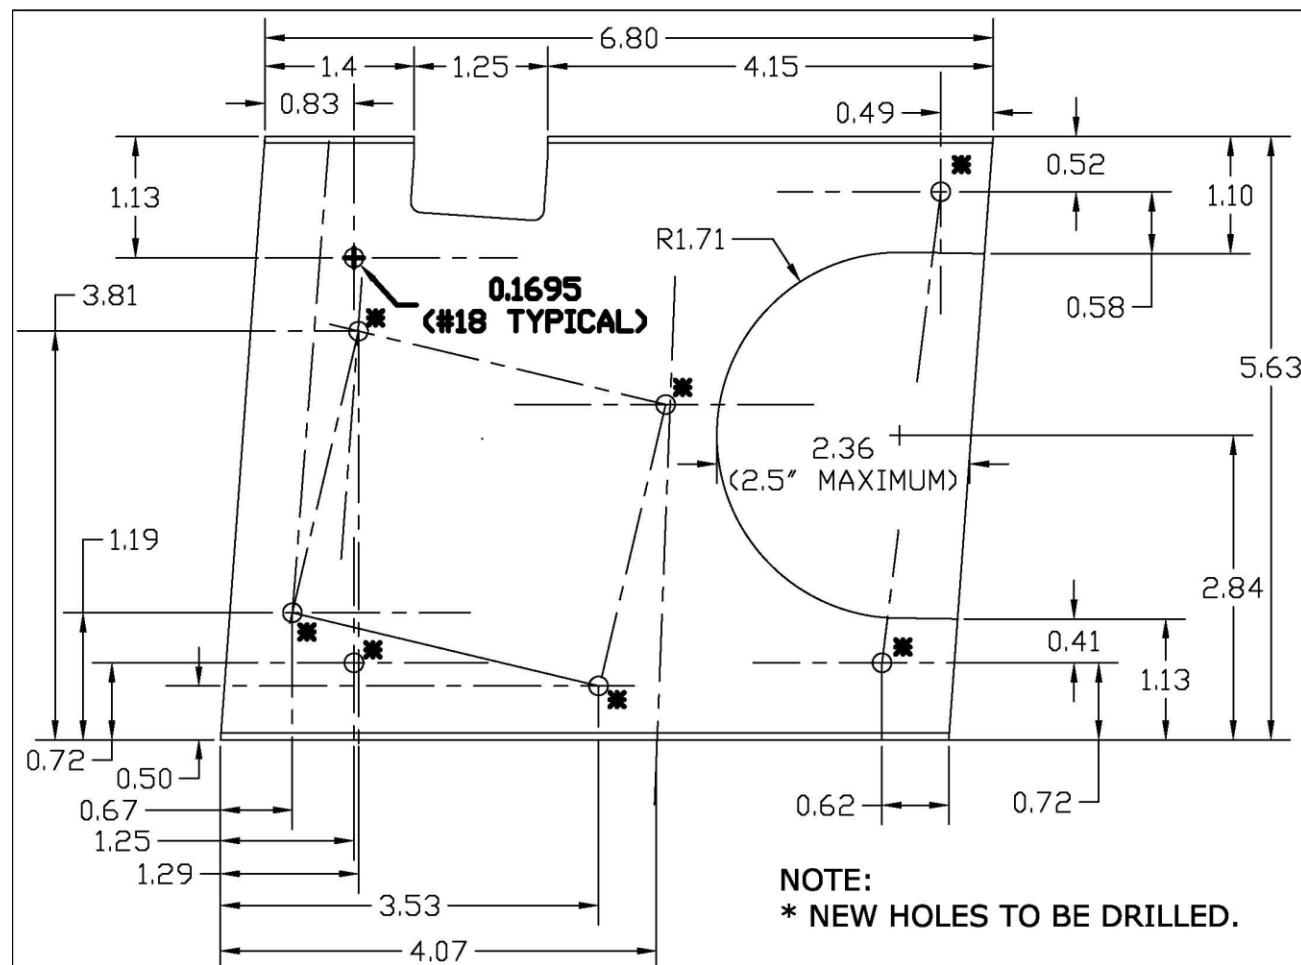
MODIFYING ROLL BRACKET FOR RETRACTABLE GEAR
